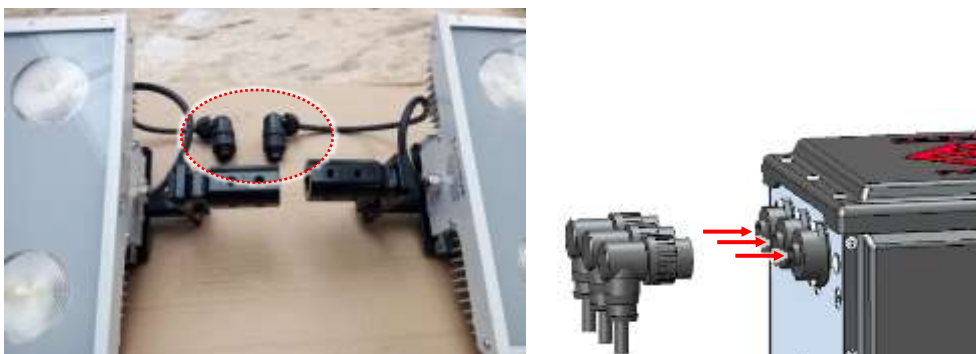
TT SPARK floodlight sets electrical connection
